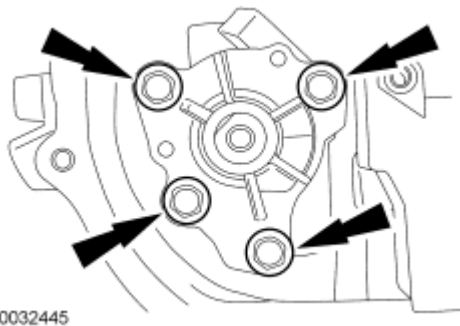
Locating Rear Crankshaft Seal Bolts
